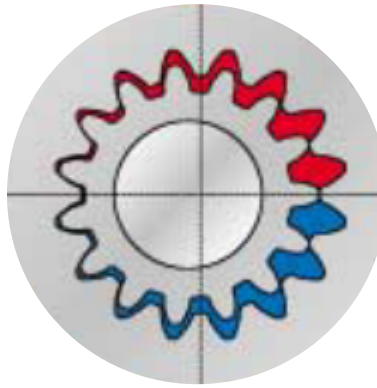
Example crescentless internal gear pump produced by Eckerle [50]
